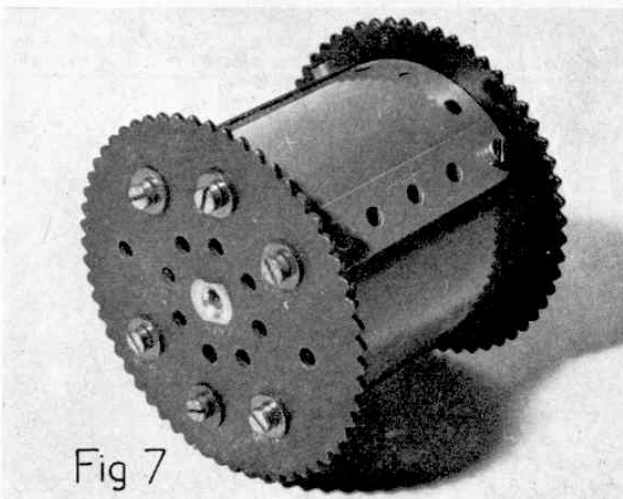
Large-diameter winding barrels can easily be built-up from curved Flexible Plates. Note the use of heavy-duty end cheeks, supplied by Sprocket Wheels in this case.
